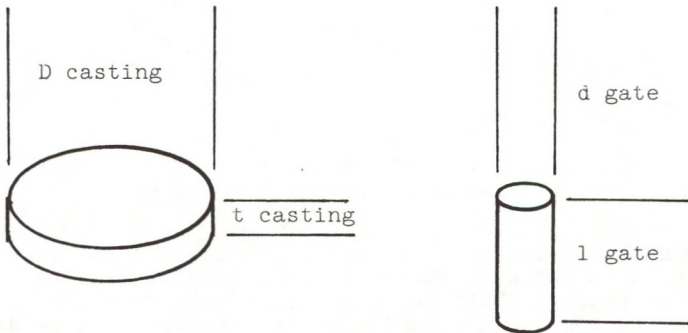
Geometrical model for disc-shaped casting and cylindrical gate.
